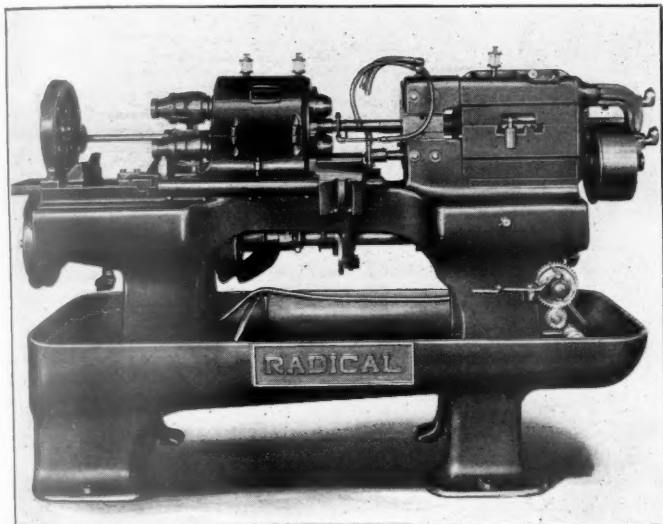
Radical 4-Spindle Automatic Turret Lathe
